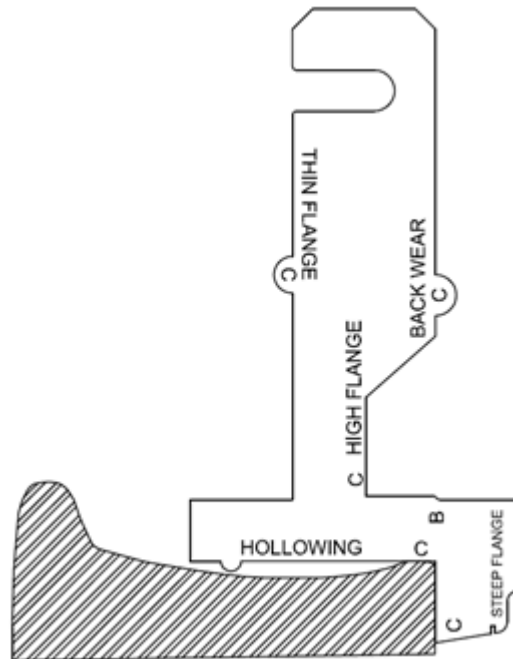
Wheel Condemn Gauge - Tread Hollowing Indication
